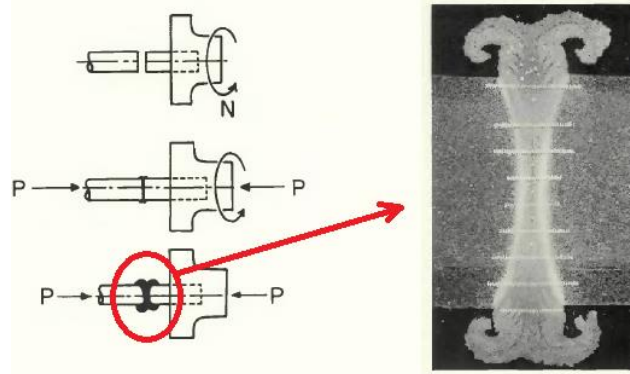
Schematic illustration of flywheel friction welding process. Source: adapted from Wang et al. (1974).
